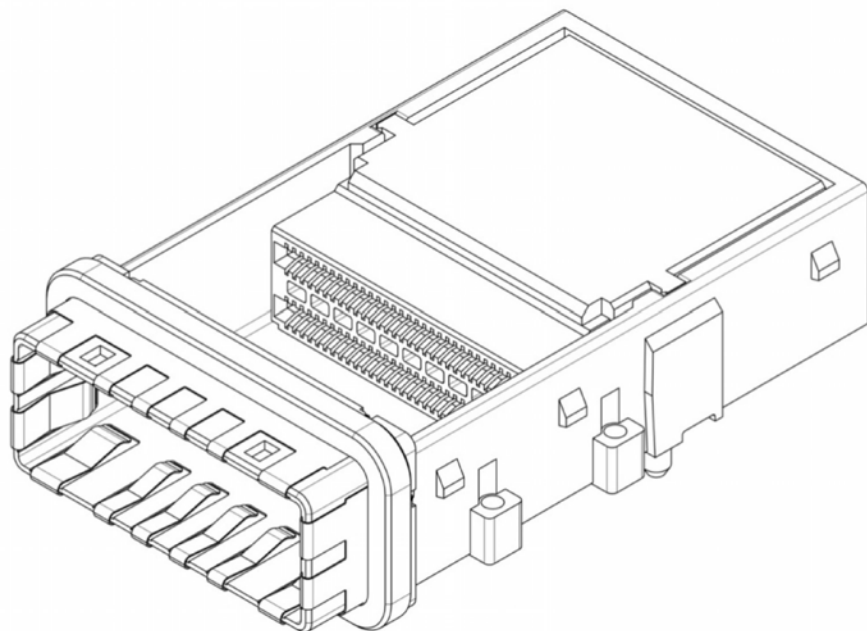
CDFP Style 1 Host Electrical Connector and Cage Illustration
